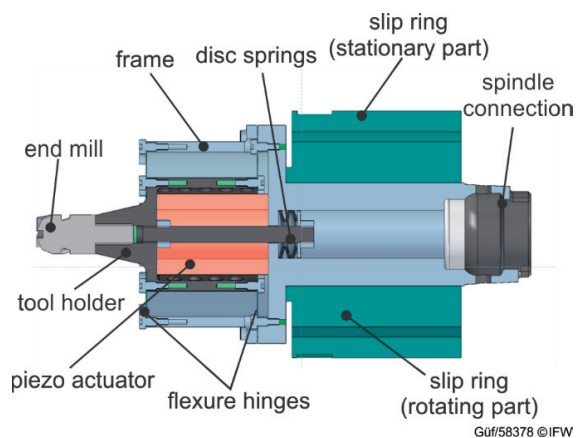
Sectional view of the piezo-actuated tool for milling operations
